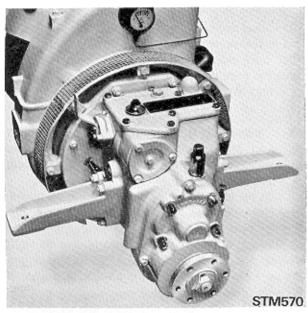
Hydraulic Reverse Gear with Reduction Gear
